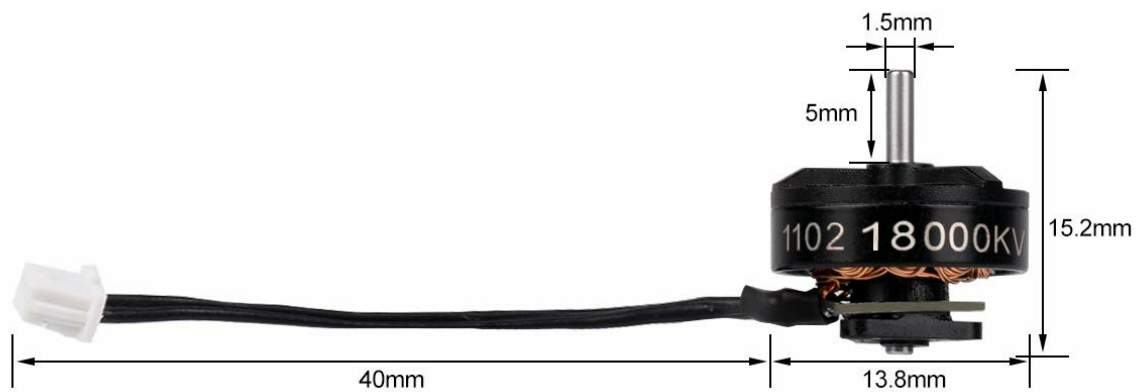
Dimensional drawing of the 1102 18000KV motor, indicating key measurements for installation.
